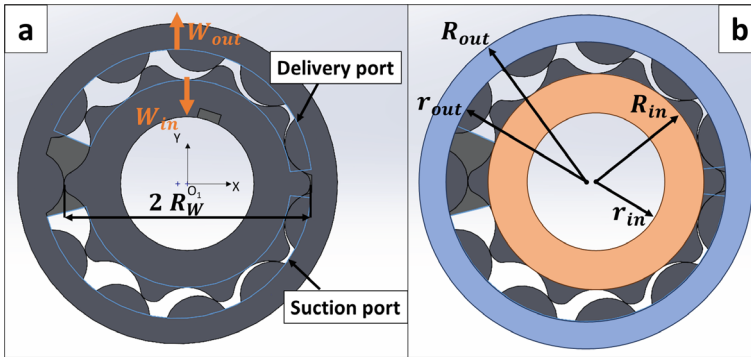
(a) Pressure gears loads and delivery/suction ports shapes. (b) Shapes of lateral clearance inner/outer gears
